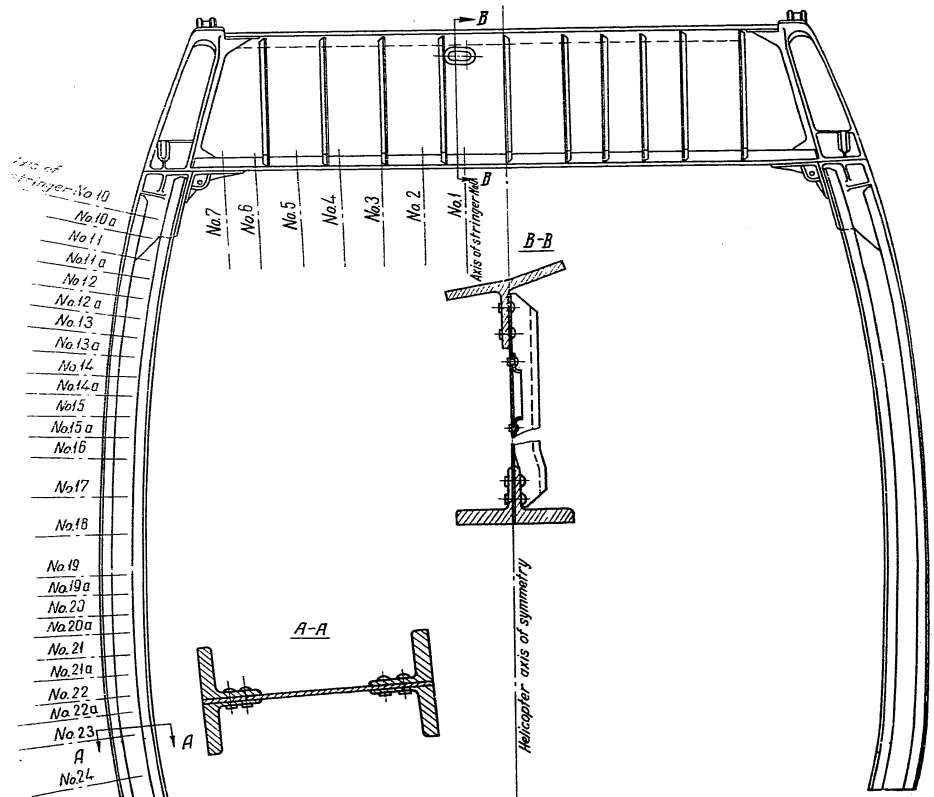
FRAME NO. 14 (STRESSED) WITH GEAR BOX MOUNT ATTACHMENT UNITS.
